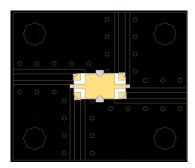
Placing the RCP2250C03 on the 8 Points of the PCB Surface
